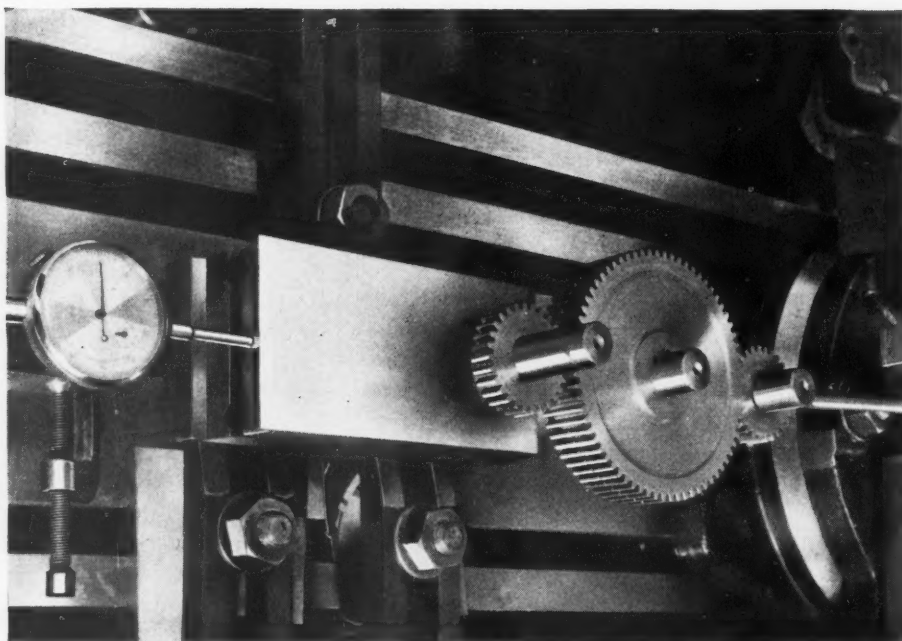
Set-up for Testing Tooth Spacing and Concentricity of Two Spur Gears at One Time
